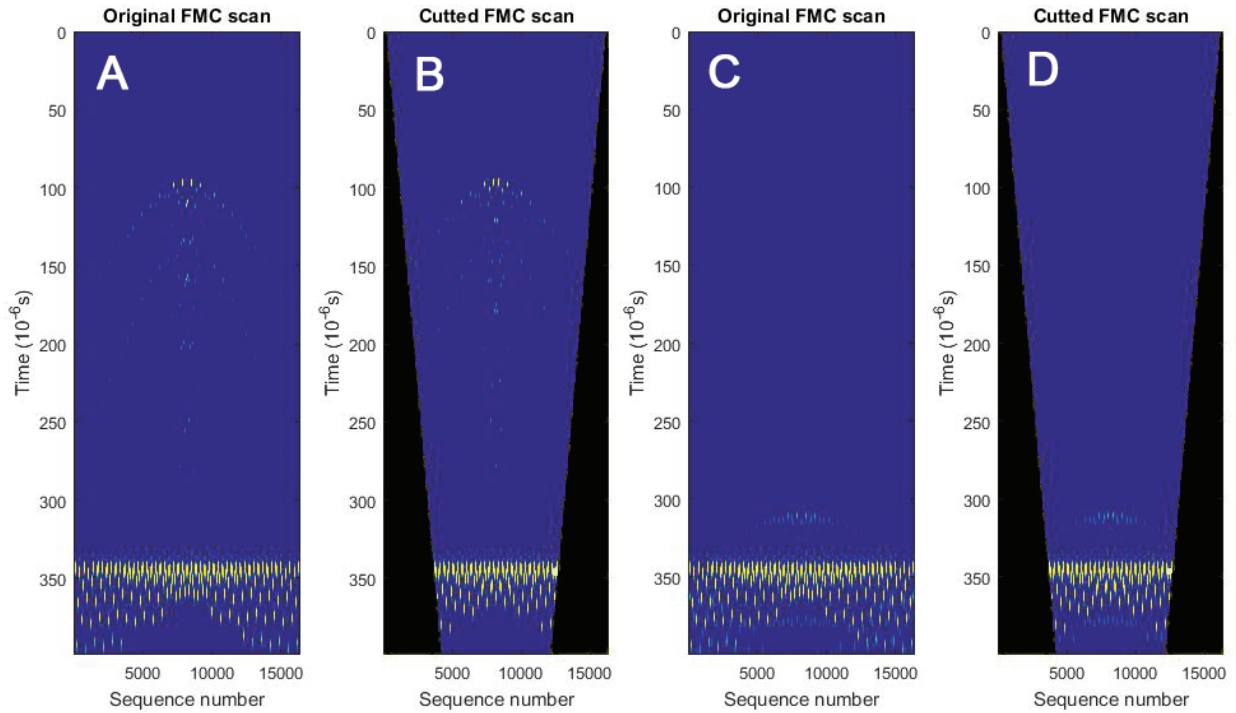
Full Matrix Capture removing sequences for artefacts removing in large size forged steel imaging using scattering cone filter from CIVA software: 265.5 mm depth defect (A and B), 900 mm depth defect (A and D).
